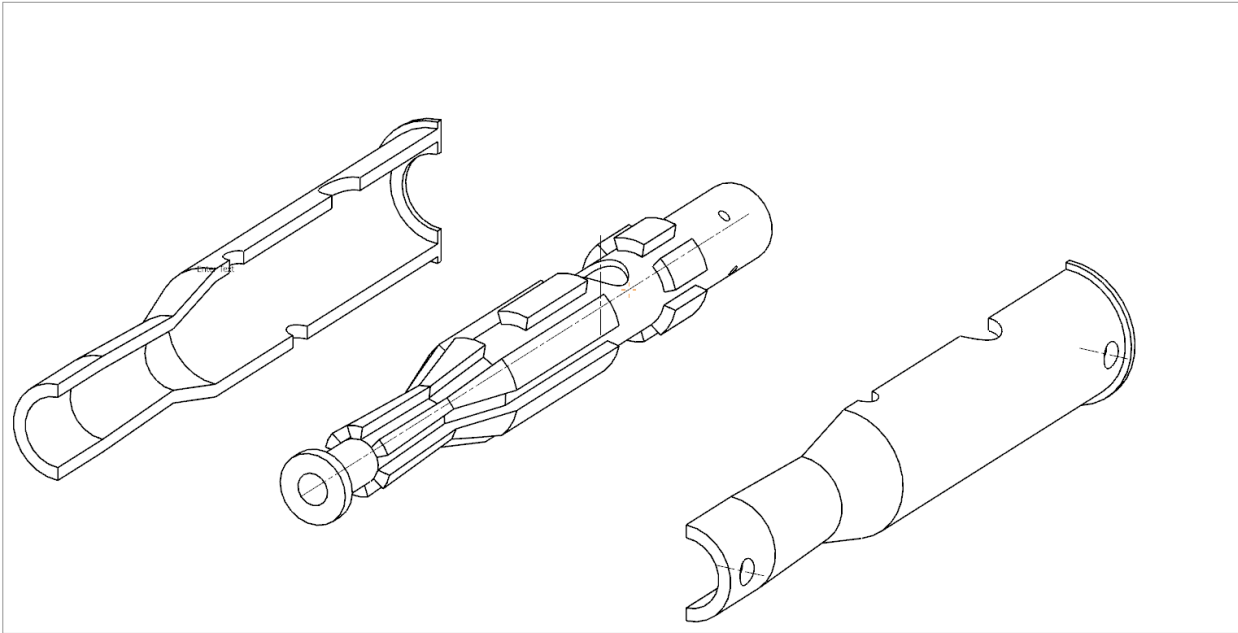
Proof of concept main combustor with cooling jacket exploded view
